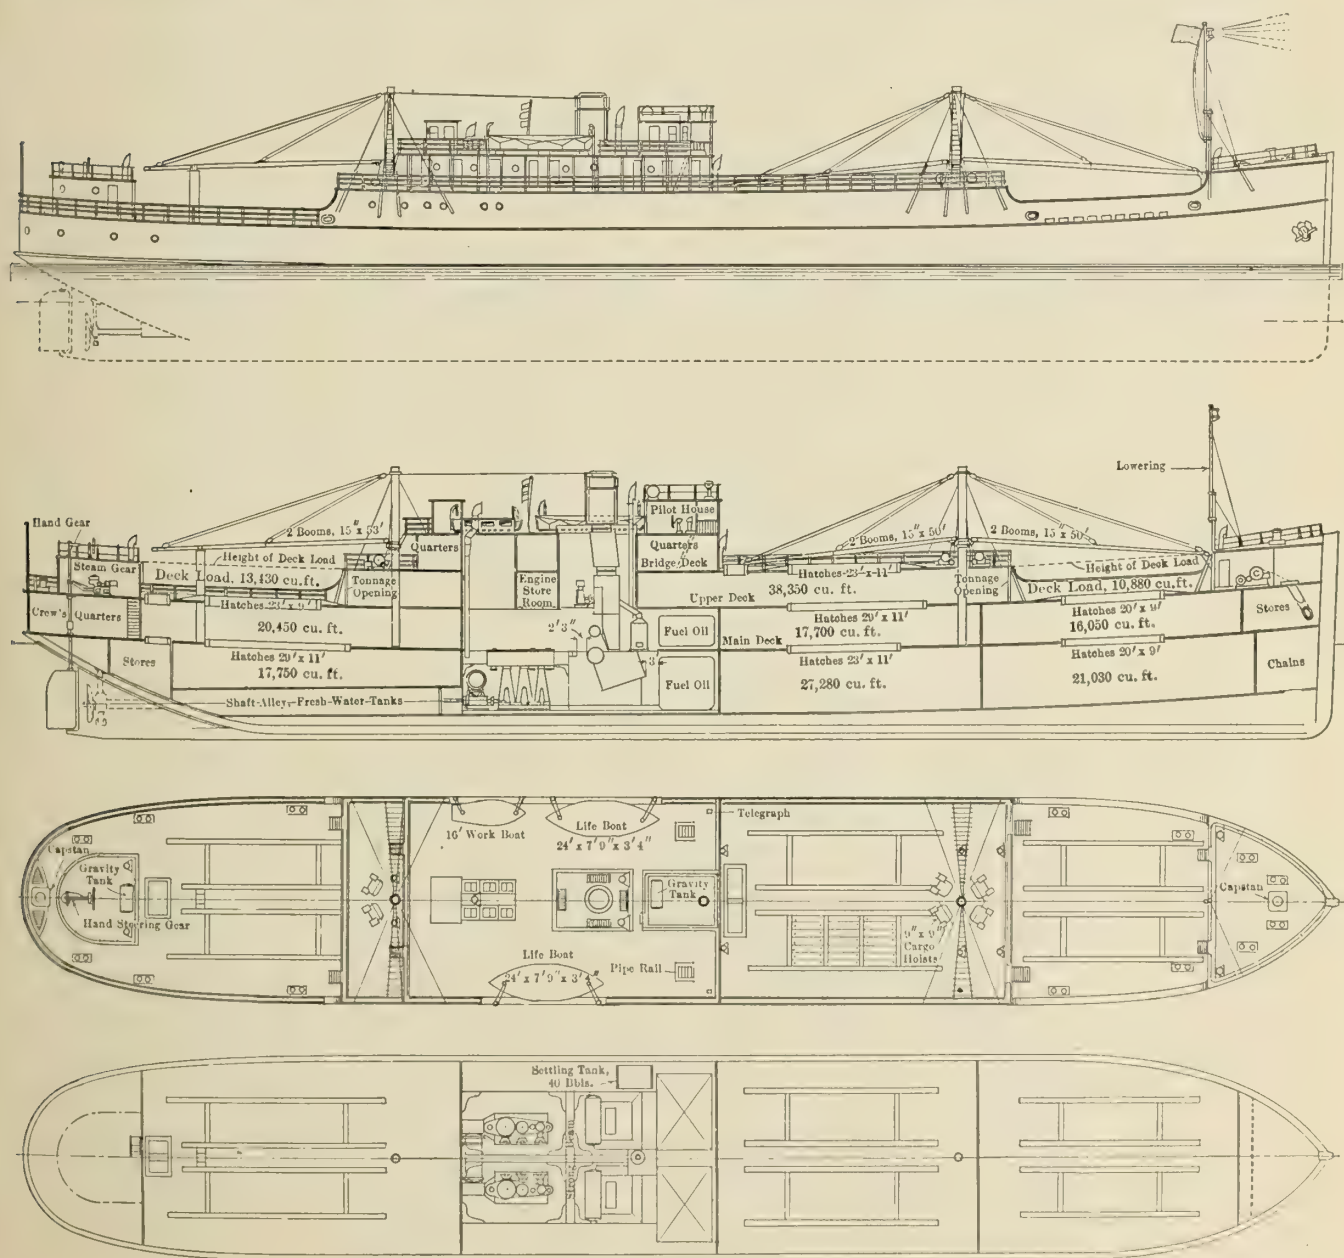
General Plans of Hough Type Wooden Lumber Steamer
